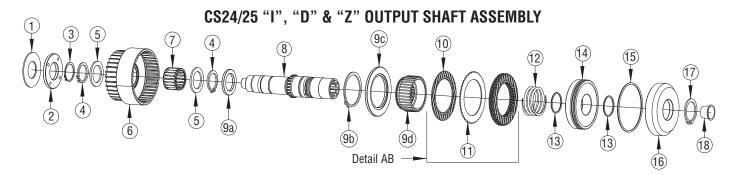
### DETAIL A – OUTPUT SHAFT ASSEMBLY
